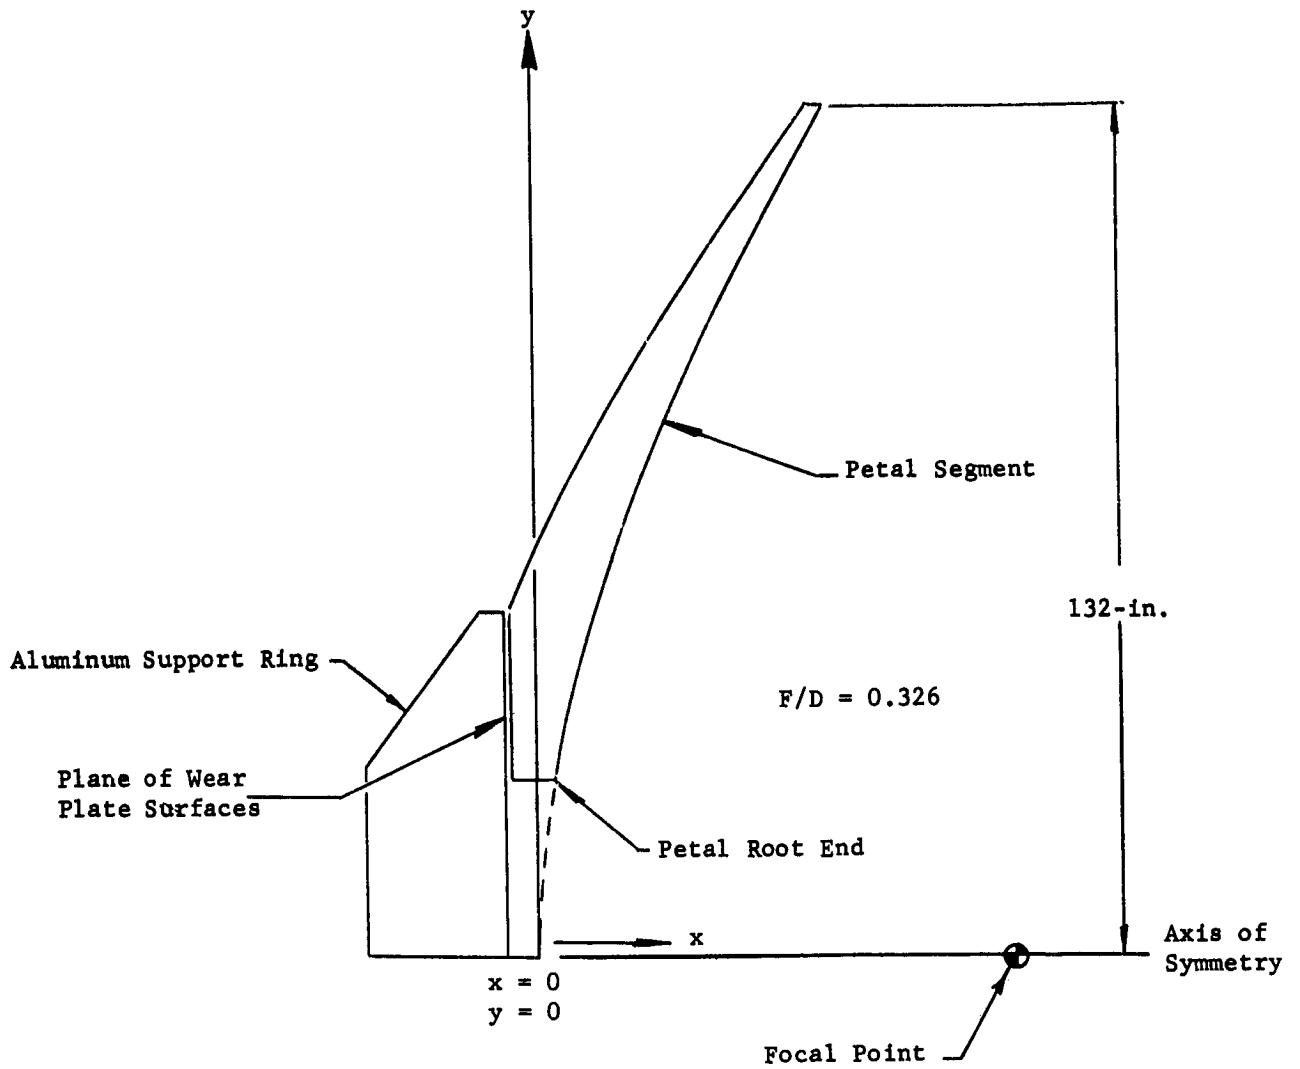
Illustration Showing Petal Segment Location in Parabola of Revolution Arrangement
